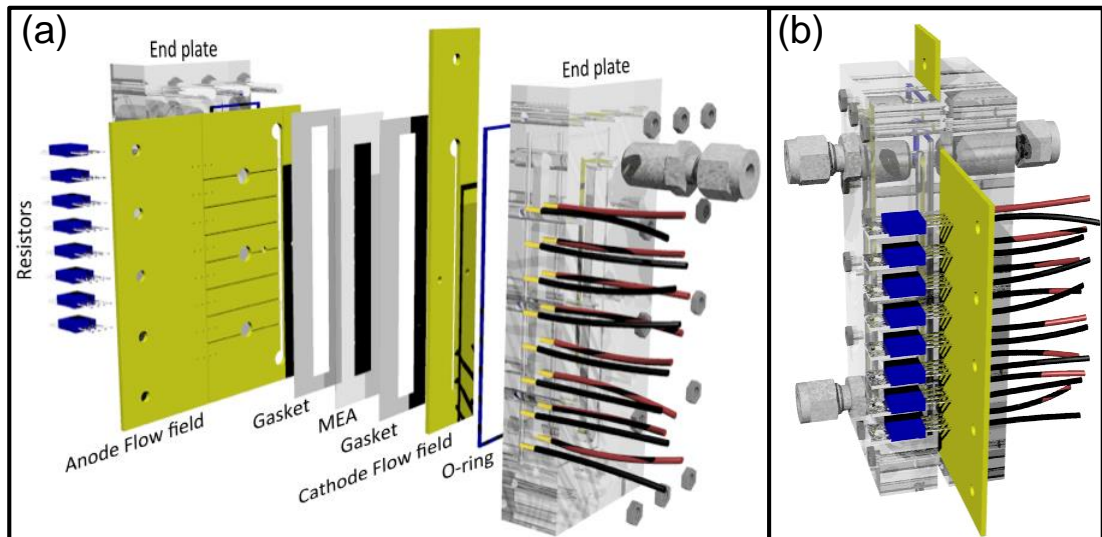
(a) An exploded view of the cell illustrating the cell components and their assembly. (b) Illustration of an assembled electrolyser cell used for current mapping measurements.
